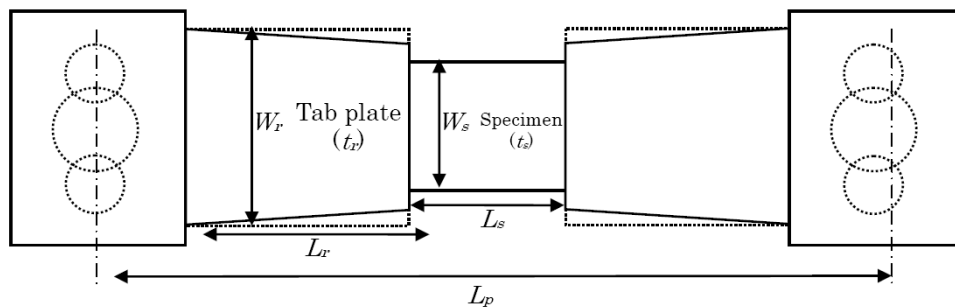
Conceptual View of Test Specimen, Tab and Load Jig
